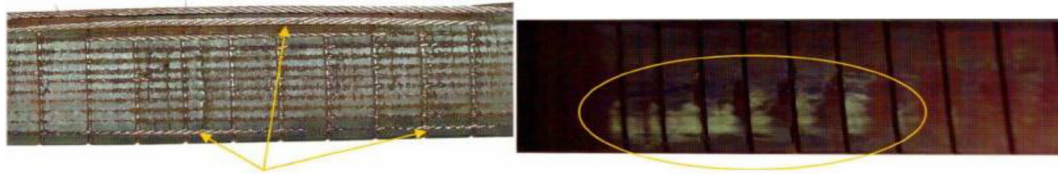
Cable protrusion and surface polishing on the belt shell [22]
